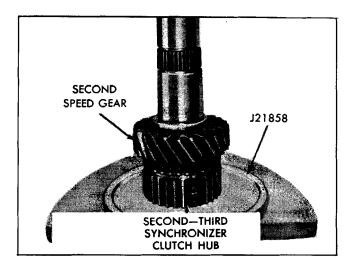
A-29 Installing 2nd & 3rd Speed Synchronizer Clutch Hub and 2nd Speed Gear
